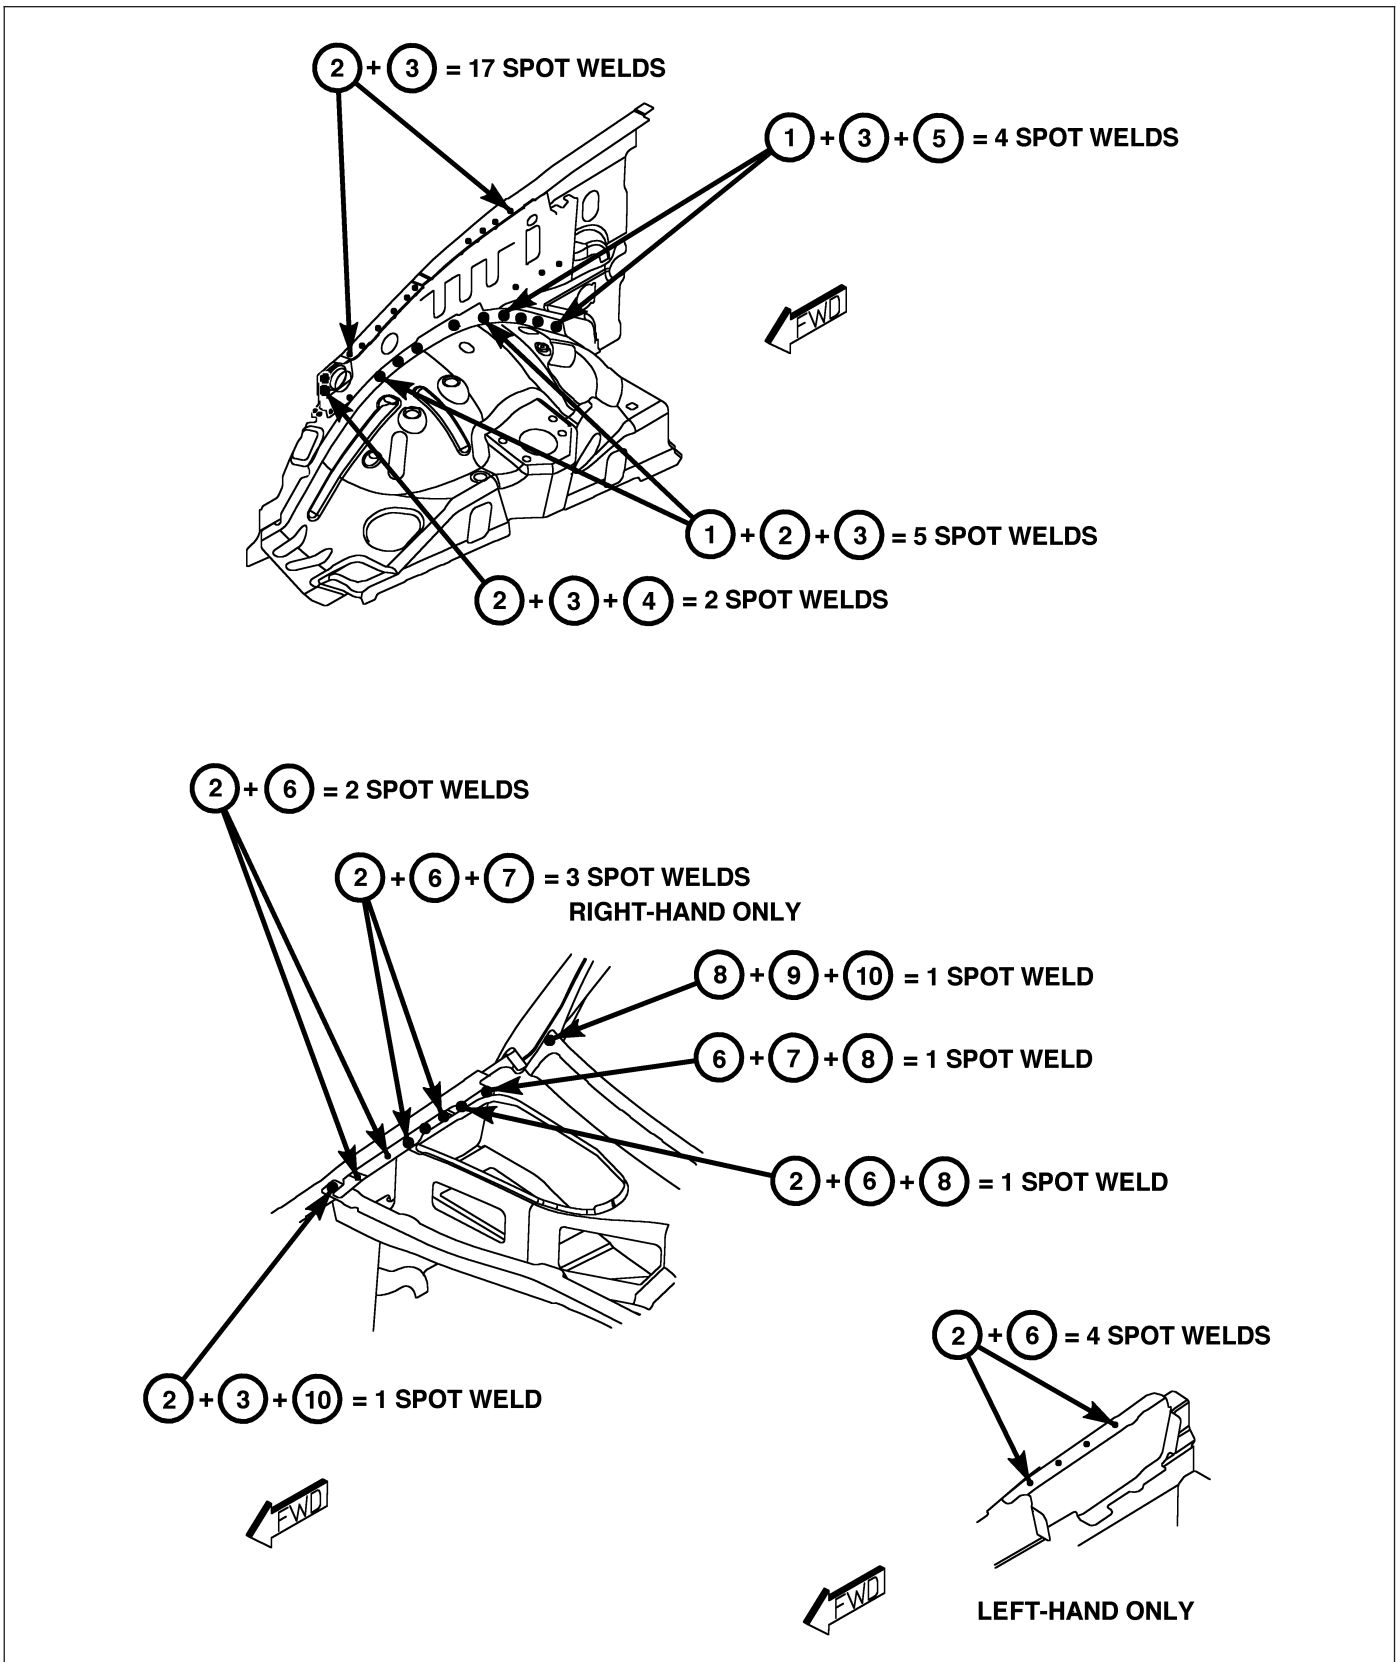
INNER FENDER REINFORCEMENT AND WHEELHOUSES
